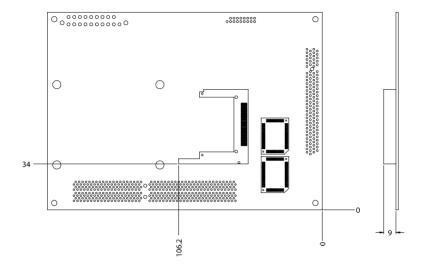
PCM-9580 Mechanical Drawing (solder side)
